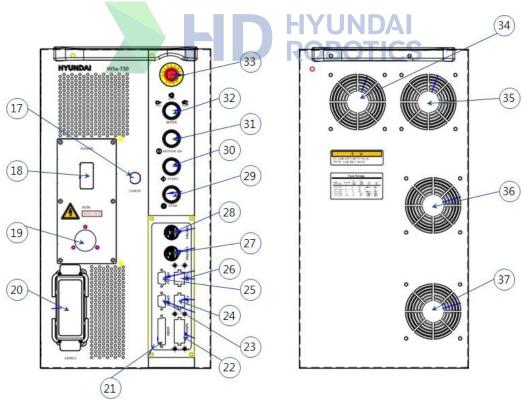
Part arrangement in the front and rear surfaces of the Hi5a-T10 controller
